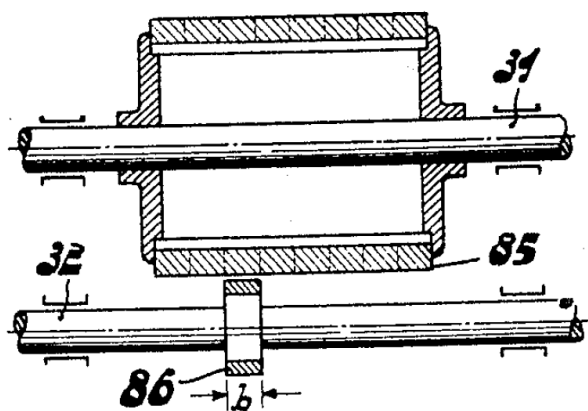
Spur-Type Magnetic Gearbox (6)
